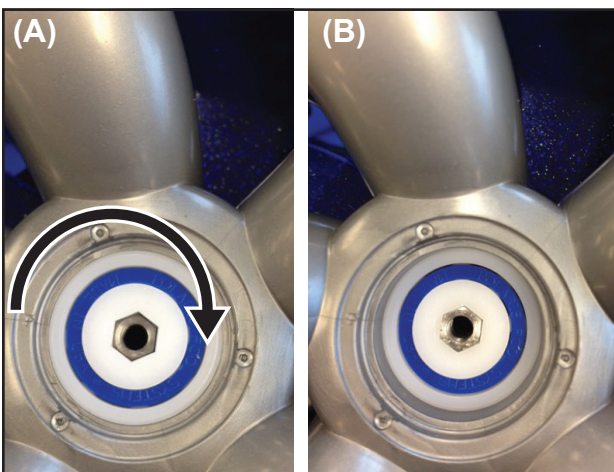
(A) Rotate bearing to align wheel shaft. (B) Press wheel bearing down.
